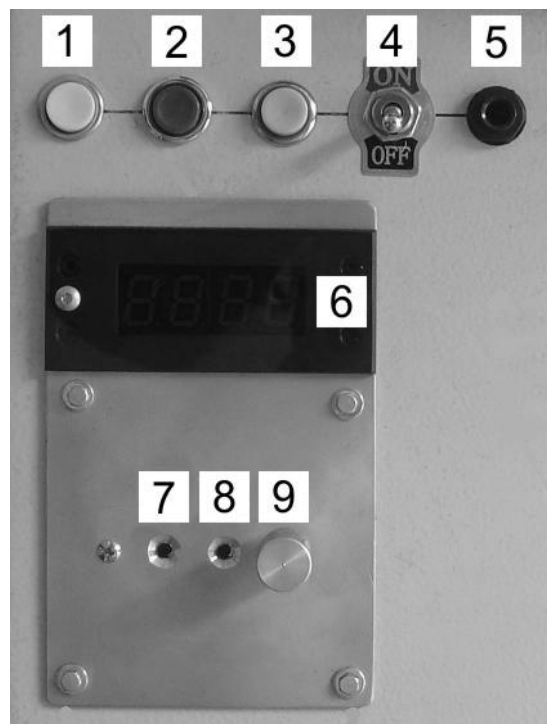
Control panel of the welding apparatus: 1 – “start” push-button, 2 – “stop” push button, 3 – “carriage return” push button, 4 – “turn on” push button, 5 – plug-in of control conduit, 6 – display, 7, 8 – “menu” push buttons, 9 – “menu” handwheel
